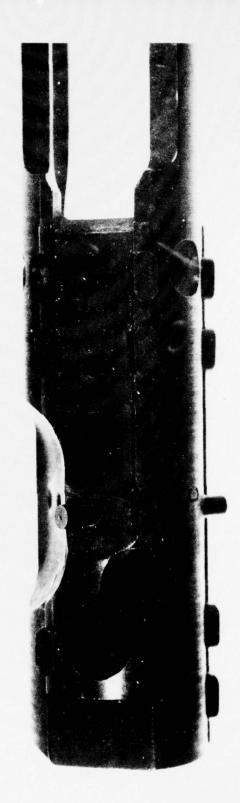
Left Side of Bolt Carrier Showing Inserts in Place.
